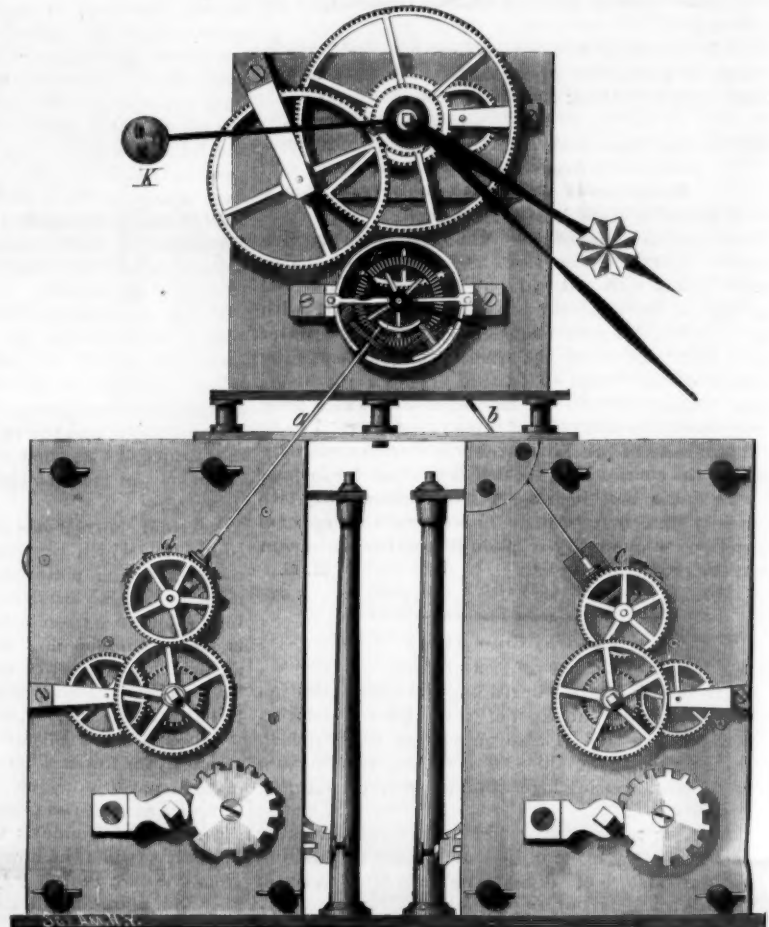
VIEW OF WORKS WITH DIALS REMOVED.
